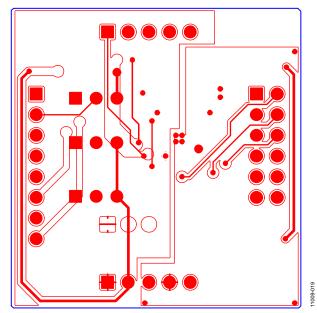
Layer 2 Side PCB Drawing of Daughter Board
